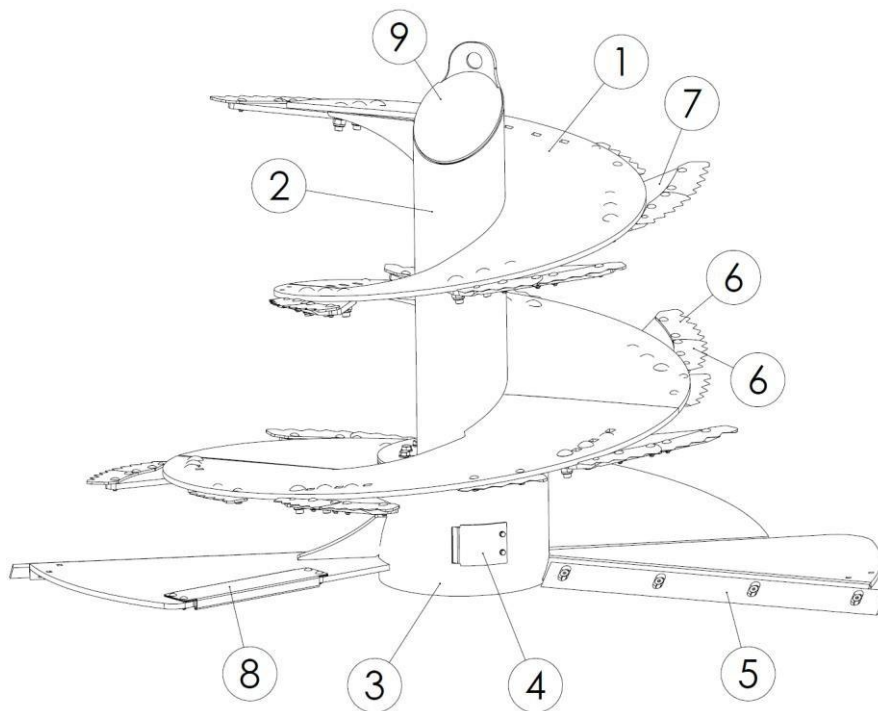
Screw: 1 - plate, 2 - top core, 3 - bottom core, 4 - bottom core, 5 - scraping knife, 6 - cutting knife, 7 - knife base, 8 - magnet, 9 - top core cap
